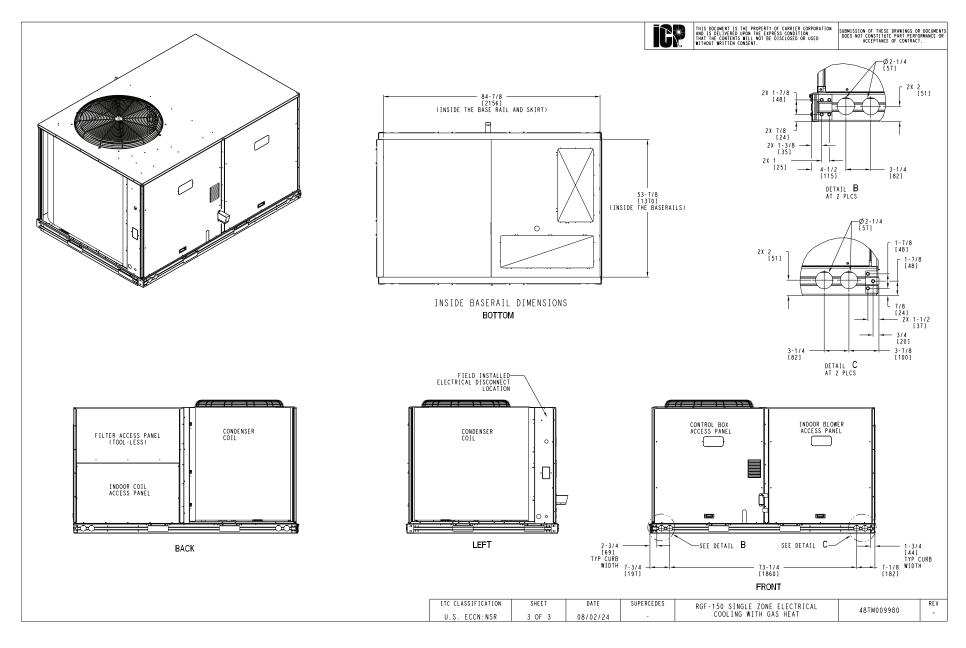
Unit Dimensional Drawing – Size 150 (cont)
